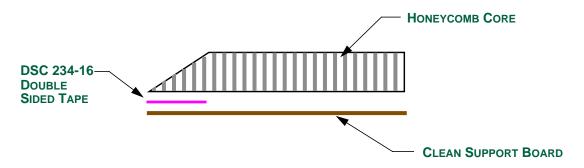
SECURING HONEYCOMB CORE FOR MACHINING
